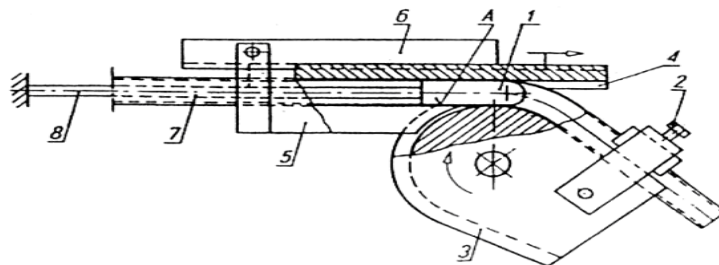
Scheme of a tube bending machine with a rotating template and a mandrel, 1-mandrel, 2-clamp bolt, 3-rotating template, 4-sliding slat, 5-planisher, 6-bed of sliding slat, 7-bending pipe, 8-mandrel rod.
